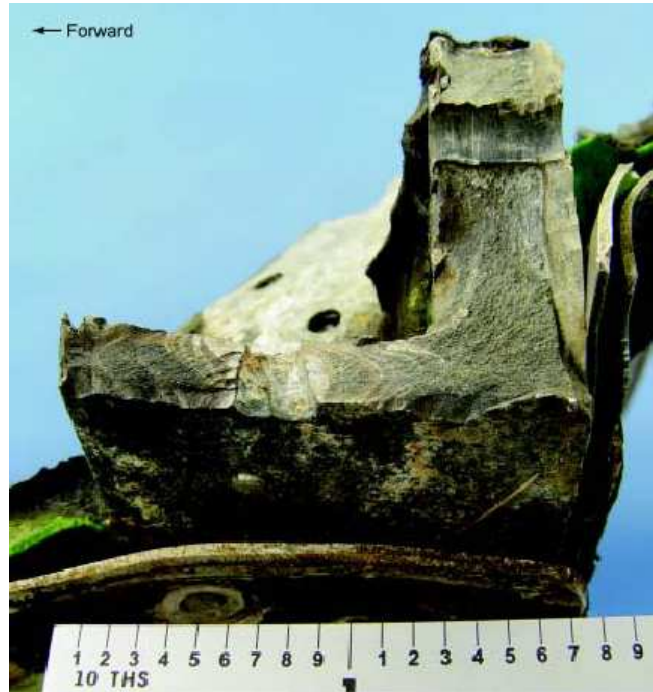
Fatigue crack initiation and growth in lower rear spar cap of right wing [1].
